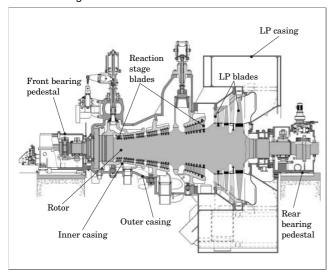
161.99 MW steam turbine, assembled cross-sectional drawing
